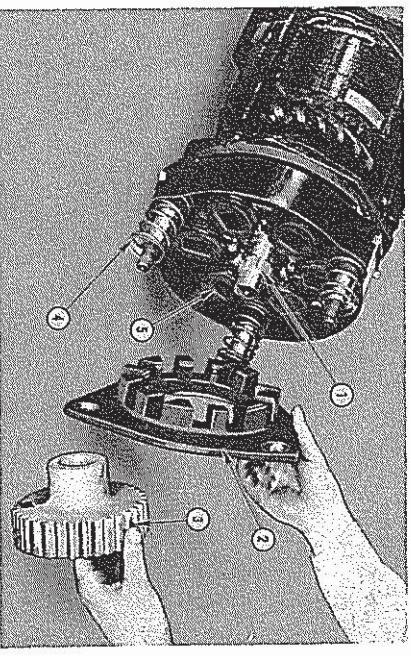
HUB AND FLOATING PLATE, REMOVED
